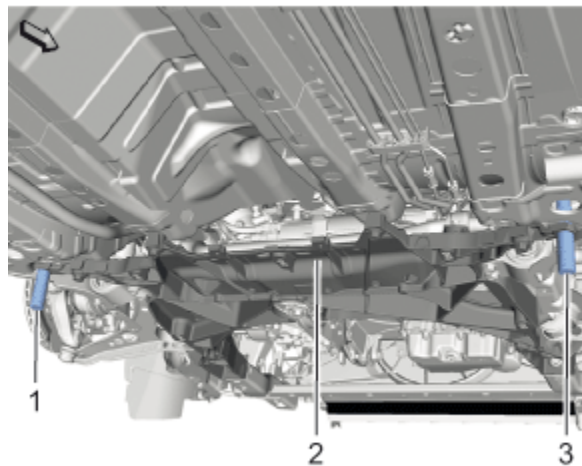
Drivetrain And Front Suspension Cradle And Alignment Pins
